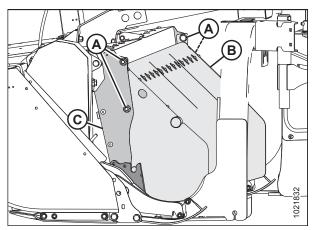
Header Side View (Left Side Shown, Right Opposite)
